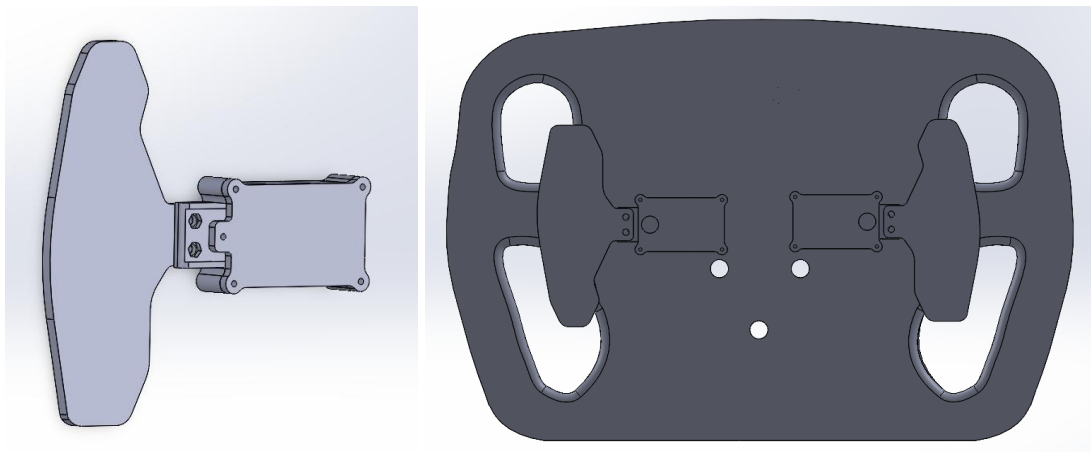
Paddle shifter assembly to the left. Steering wheel assembly with paddle levers to the right.
